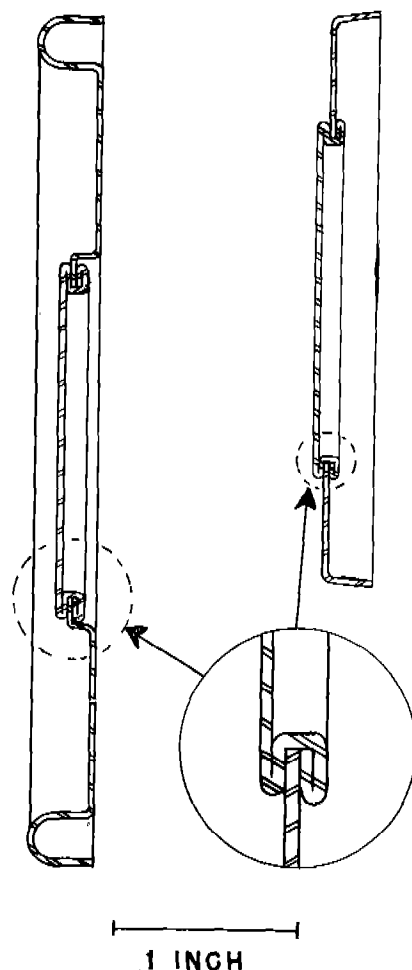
Front end motor seals for 5.0- and 3.5-in. motors.
